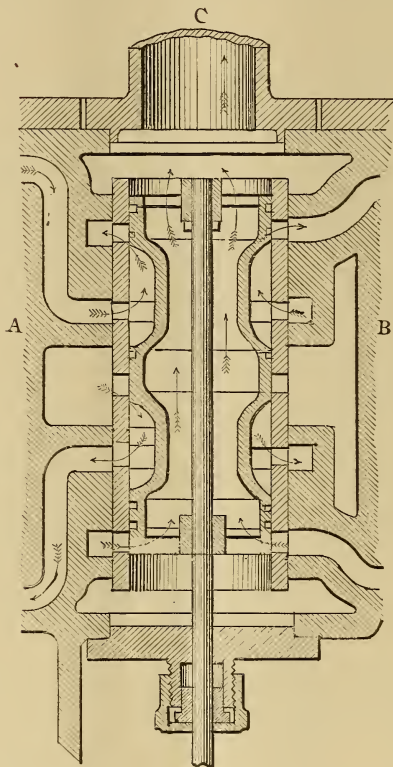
SECTION THROUGH THE ENGINE VALVE.
